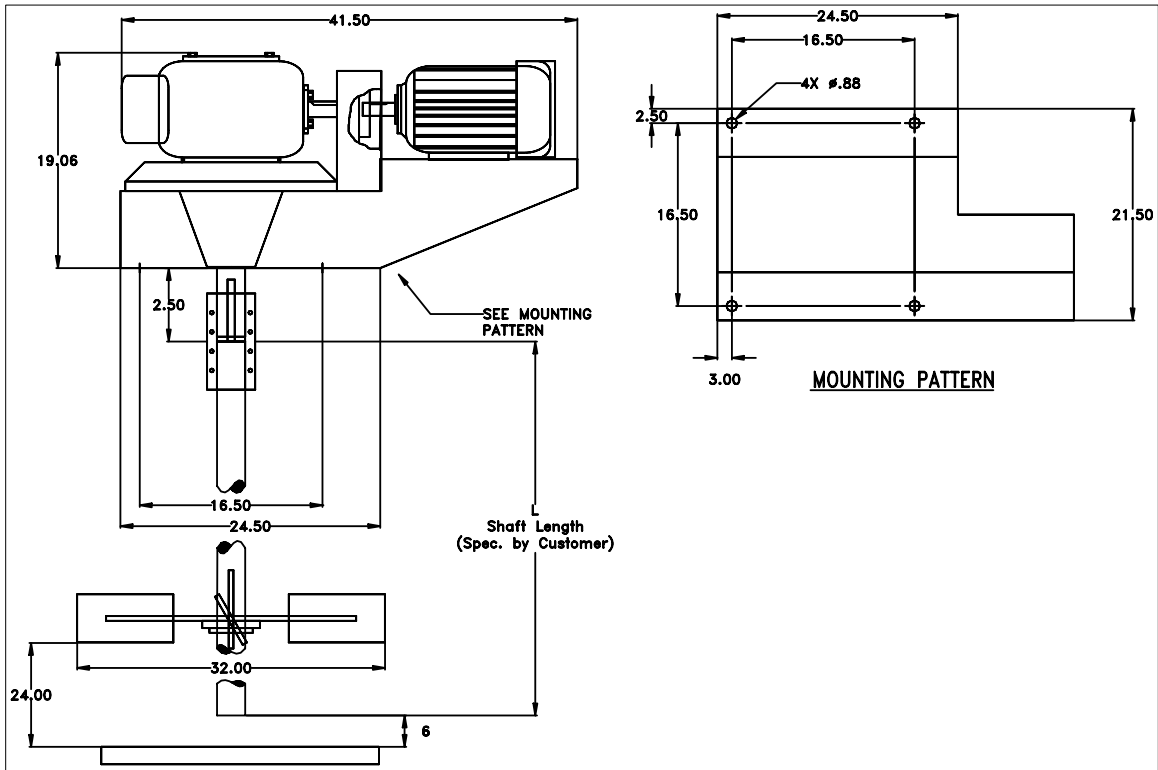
DIMENSIONAL DRAWING MA-7.5
